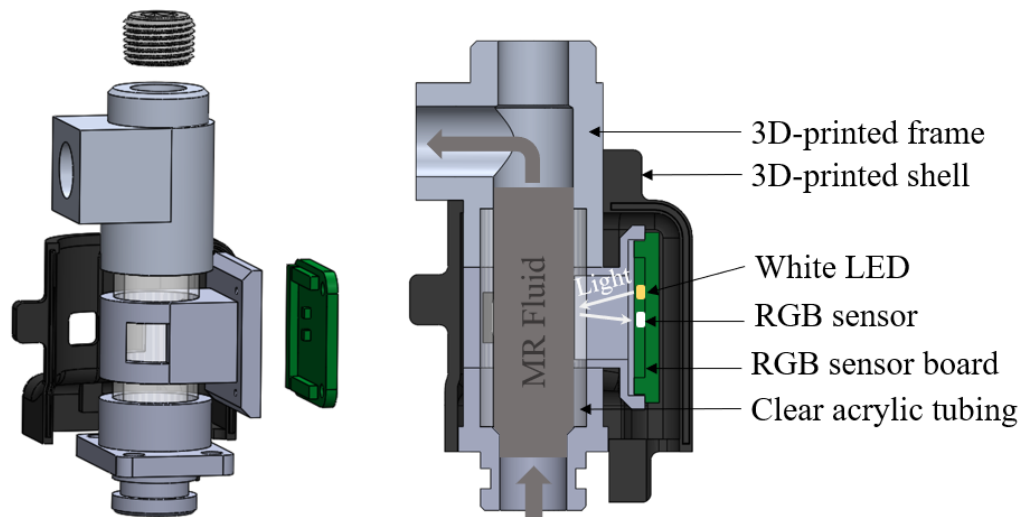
Exploded and sectional view of the monitoring sensor.
